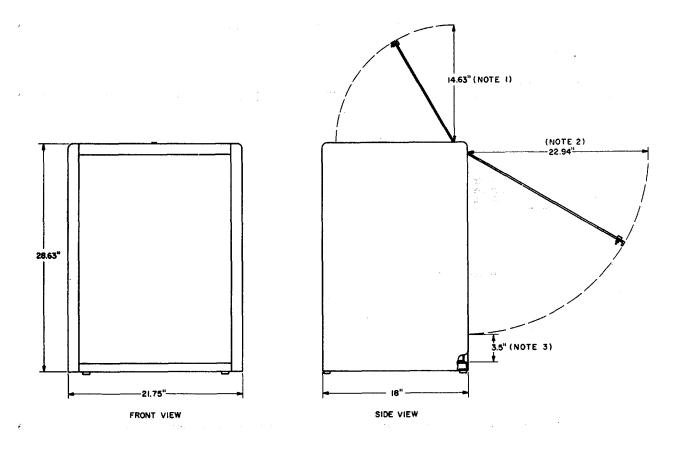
Recorder-Reproducer Set, Sound AN/GHS-17, dimensional drawing.
